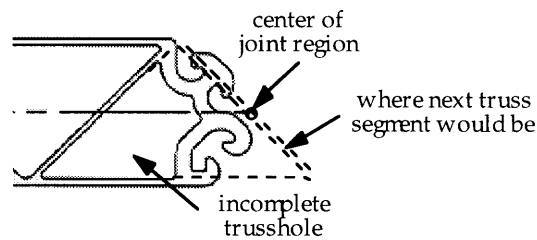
Joint features and the incomplete trusshole. The joint center lies at the center of a virtual truss segment to maintain symmetry of fractional panels.
